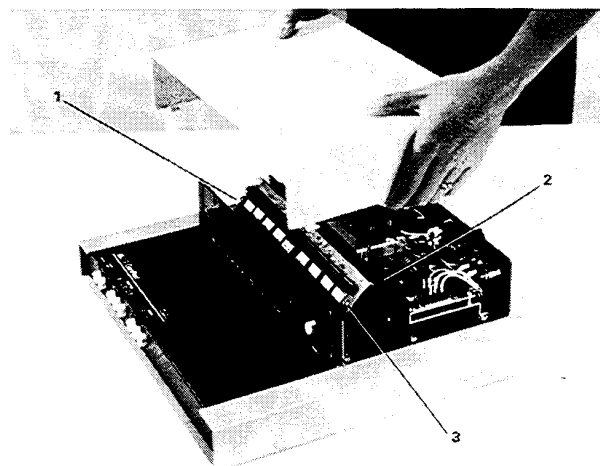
Removal of top cover. Items 1 and 3 are screws that hold the display board. Item 2 is ribbon cable 1657-0200 that connects power supply to C board.
